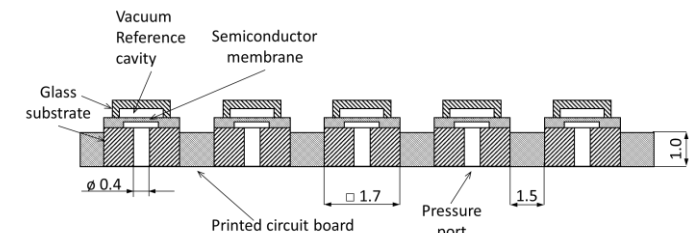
Schematic side view section of the pressure sensors in the printed circuit board. Dimensions are given in millimeters. Sketch not to scale.
